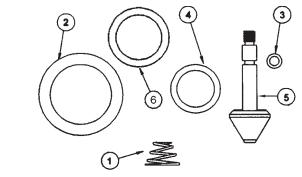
Wet Valve Seal Rebuilding Kit (P/N 550698).
